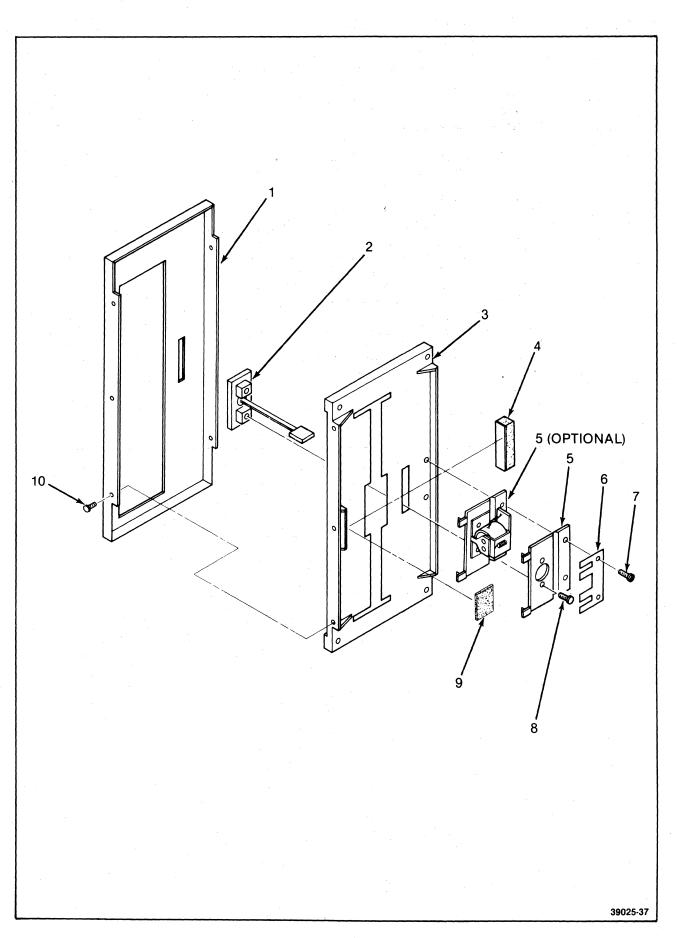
FRONT PLATE ASSEMBLY EXPLODED VIEW
